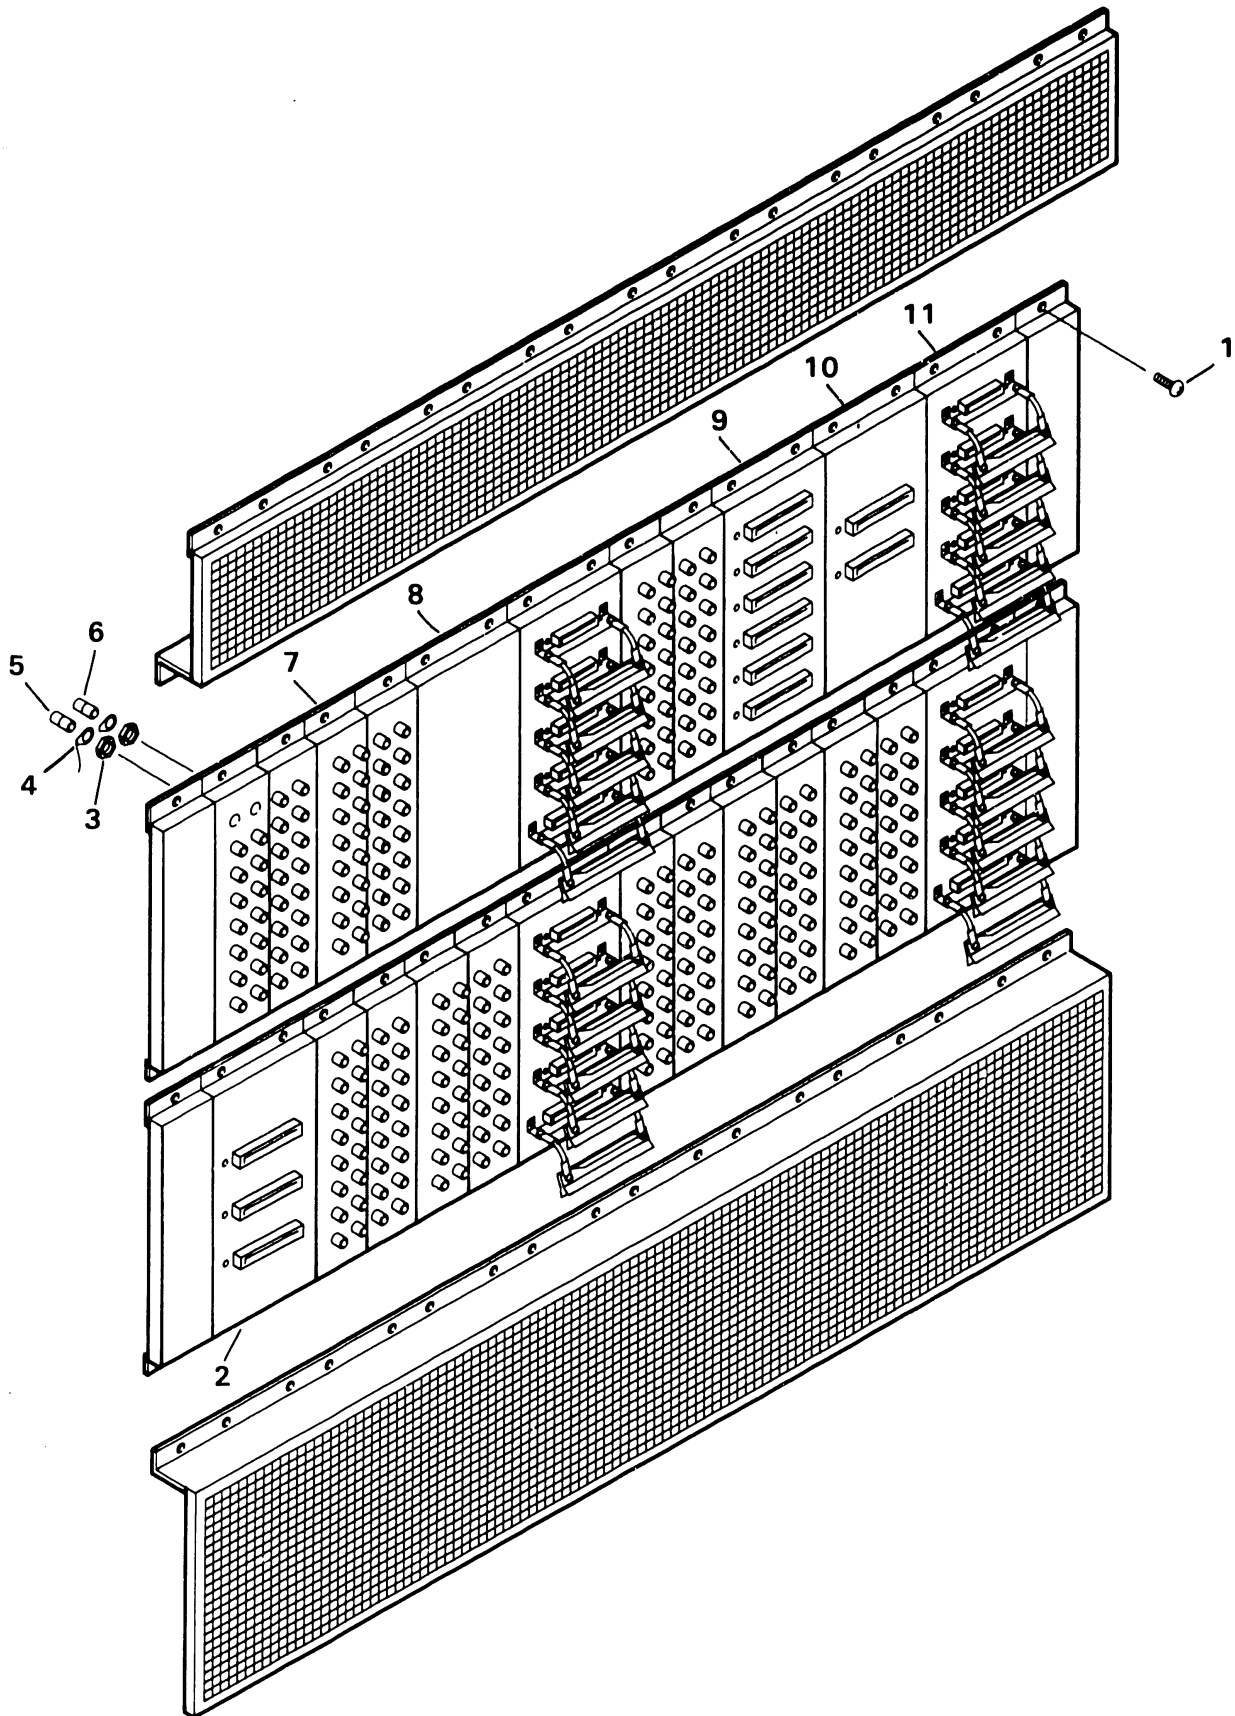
UNIT REAR ASSEMBLY (NO ASSEMBLY PART NO.)
